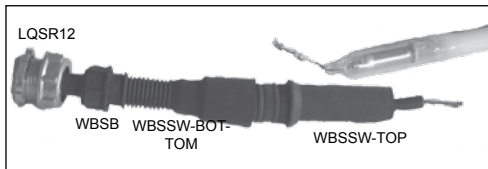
Slide the top part of Wetbits Short Sleeve over WB3760 and Gto Cable
